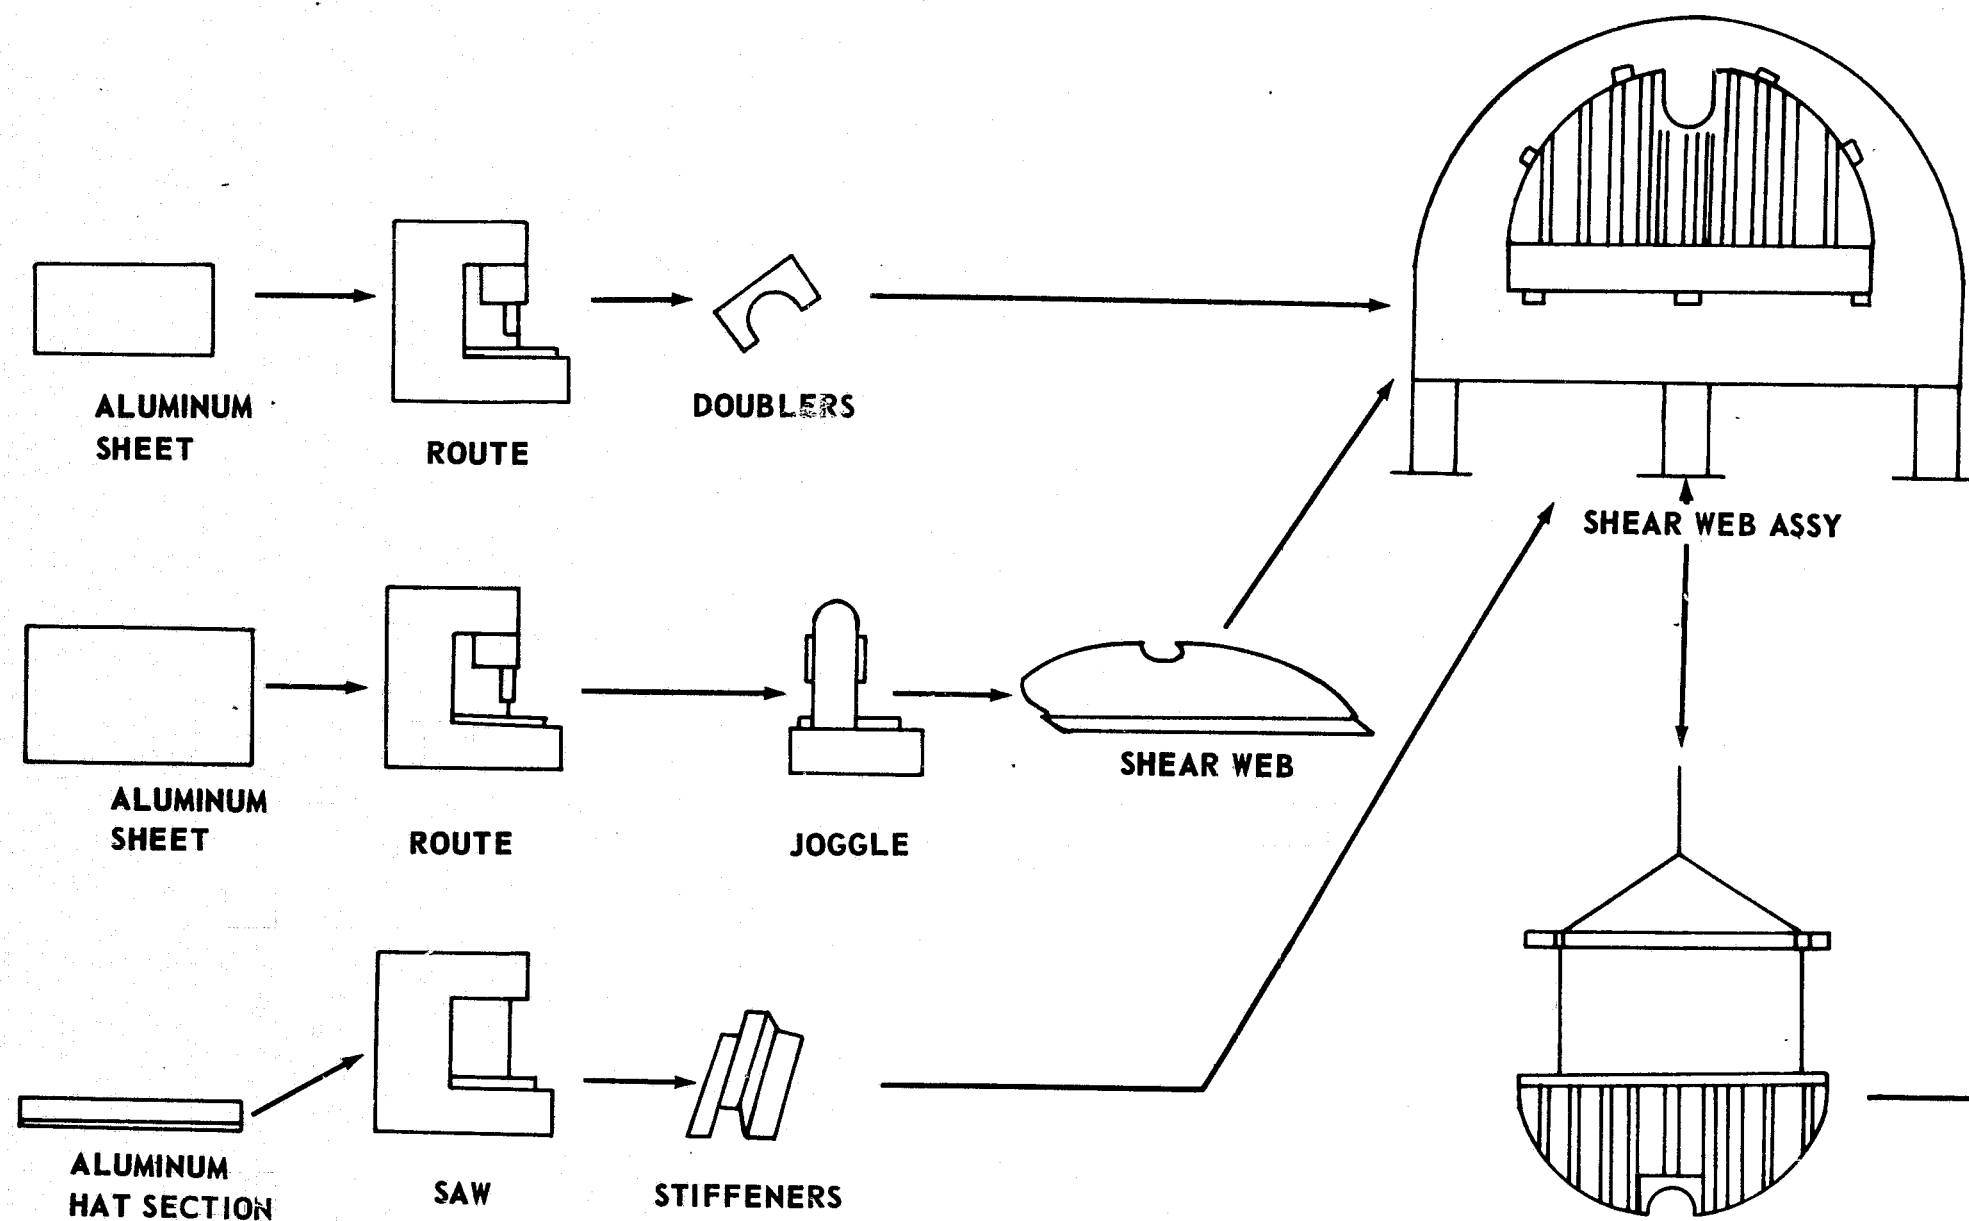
SHEAR WEB ASSEMBLY
